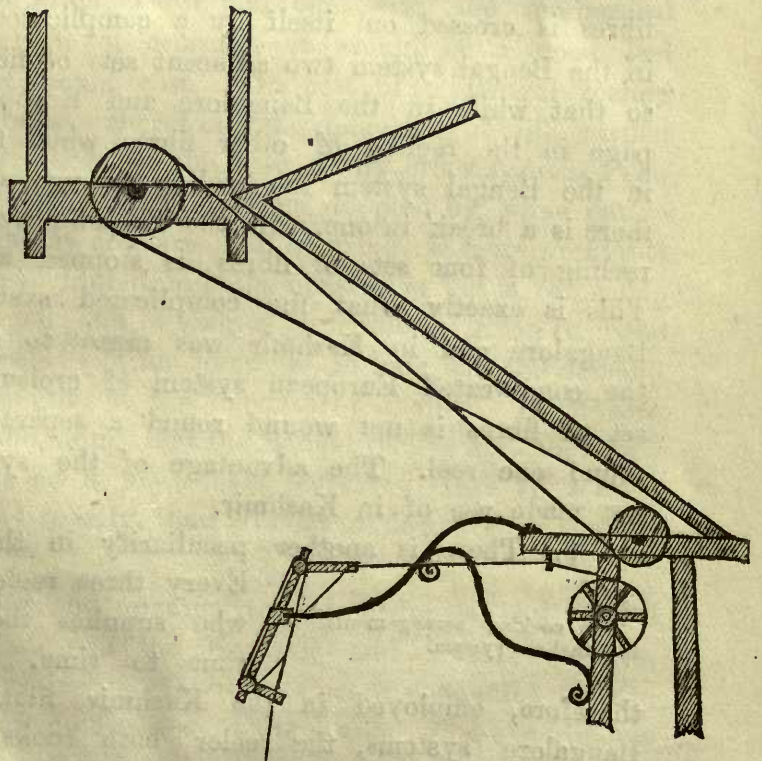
Fig. V.—Attachment of driving gear of Japanese reeling machine to reels.
